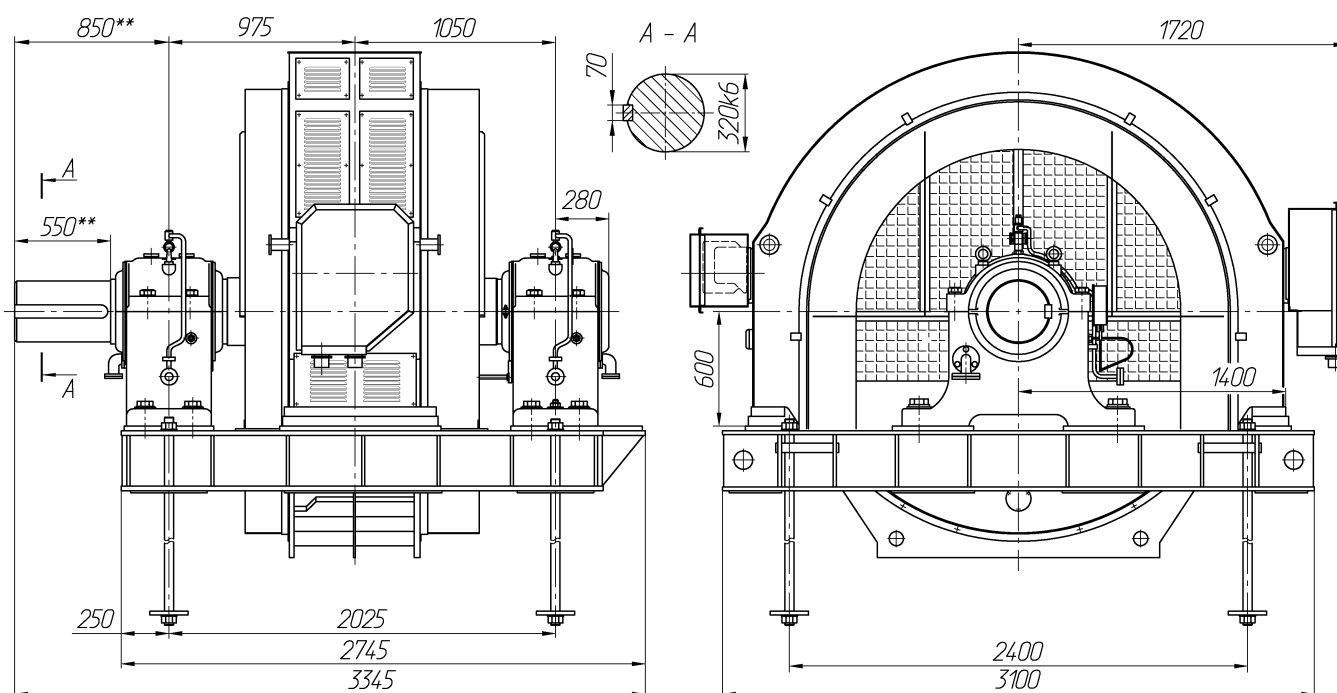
Electric motors CD4-3150-16 (IM7311, with cylindrical shaft end).
